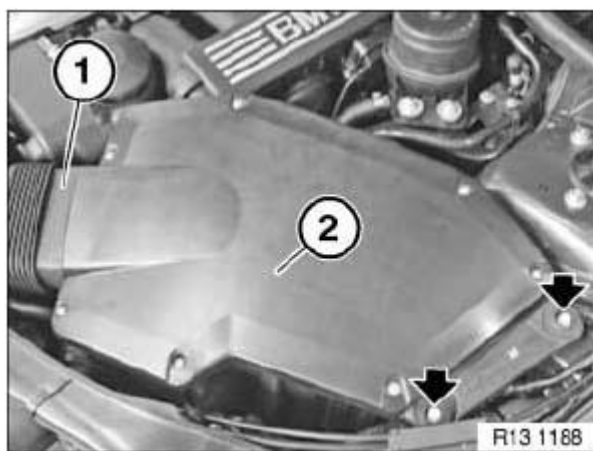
Identifying Filter Housing And Air Intake Hose (3-Series)
